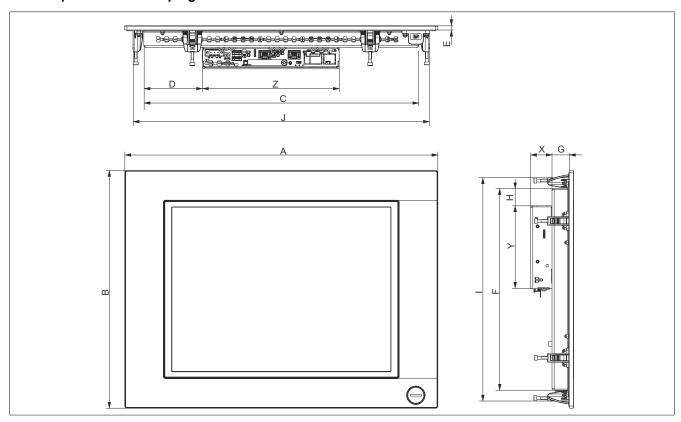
Panel PC 2200 with AP1000 panels with clamping blocks - Dimensions
